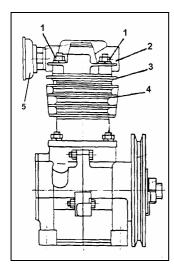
Compressor V-belt tension inspection. 1- screws; 2- bracket.
